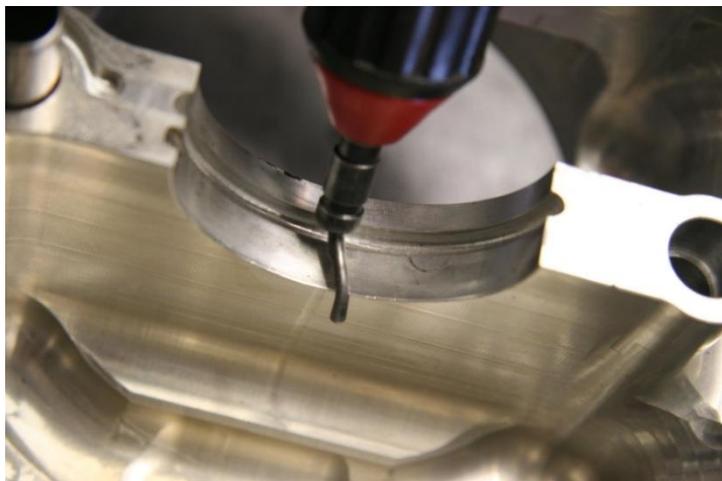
De-Burring Crankcase After Surfacing & Line Boring
